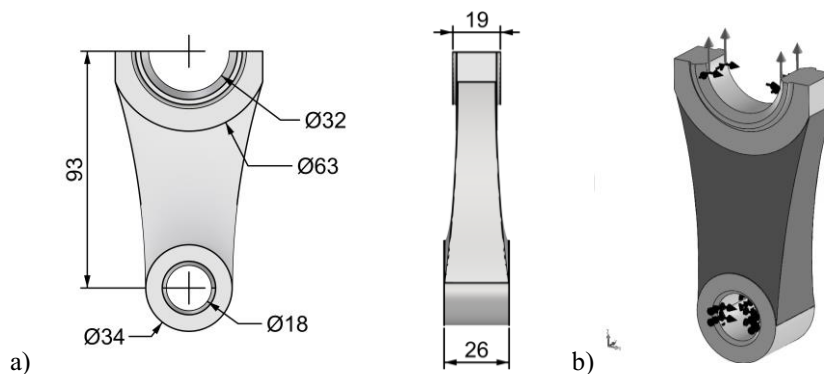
Piston rod: a) overall model dimensions, b) design space (dark grey), loads and constraints.
